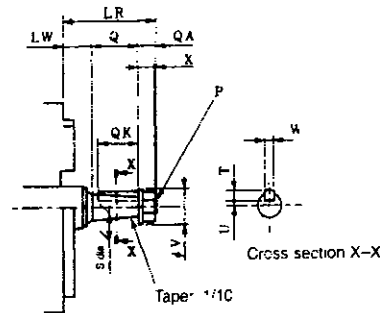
18 Shaft End Specification 3· Tapered 1/10, with Parallel Key
